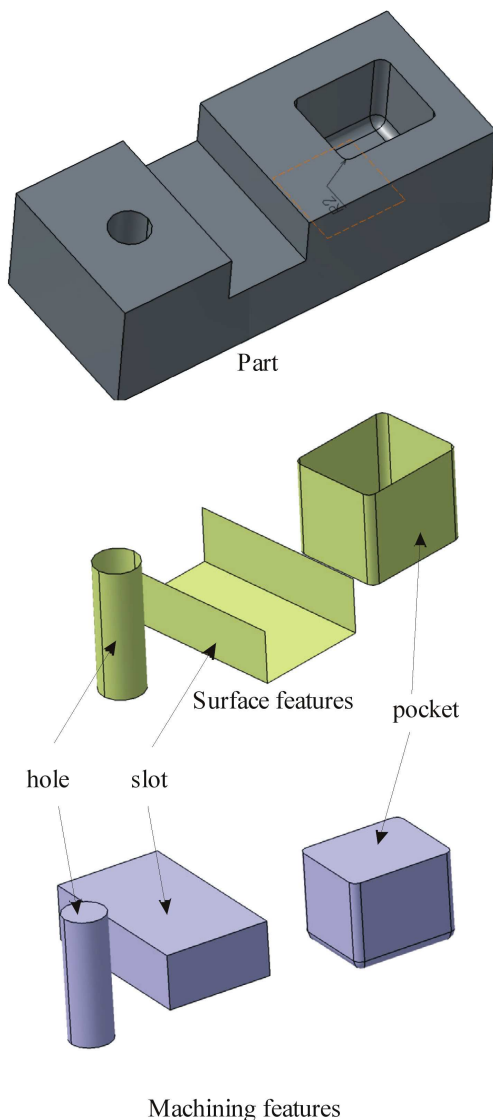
An example of part and its surface and machining features: hole, slot, pocket.
